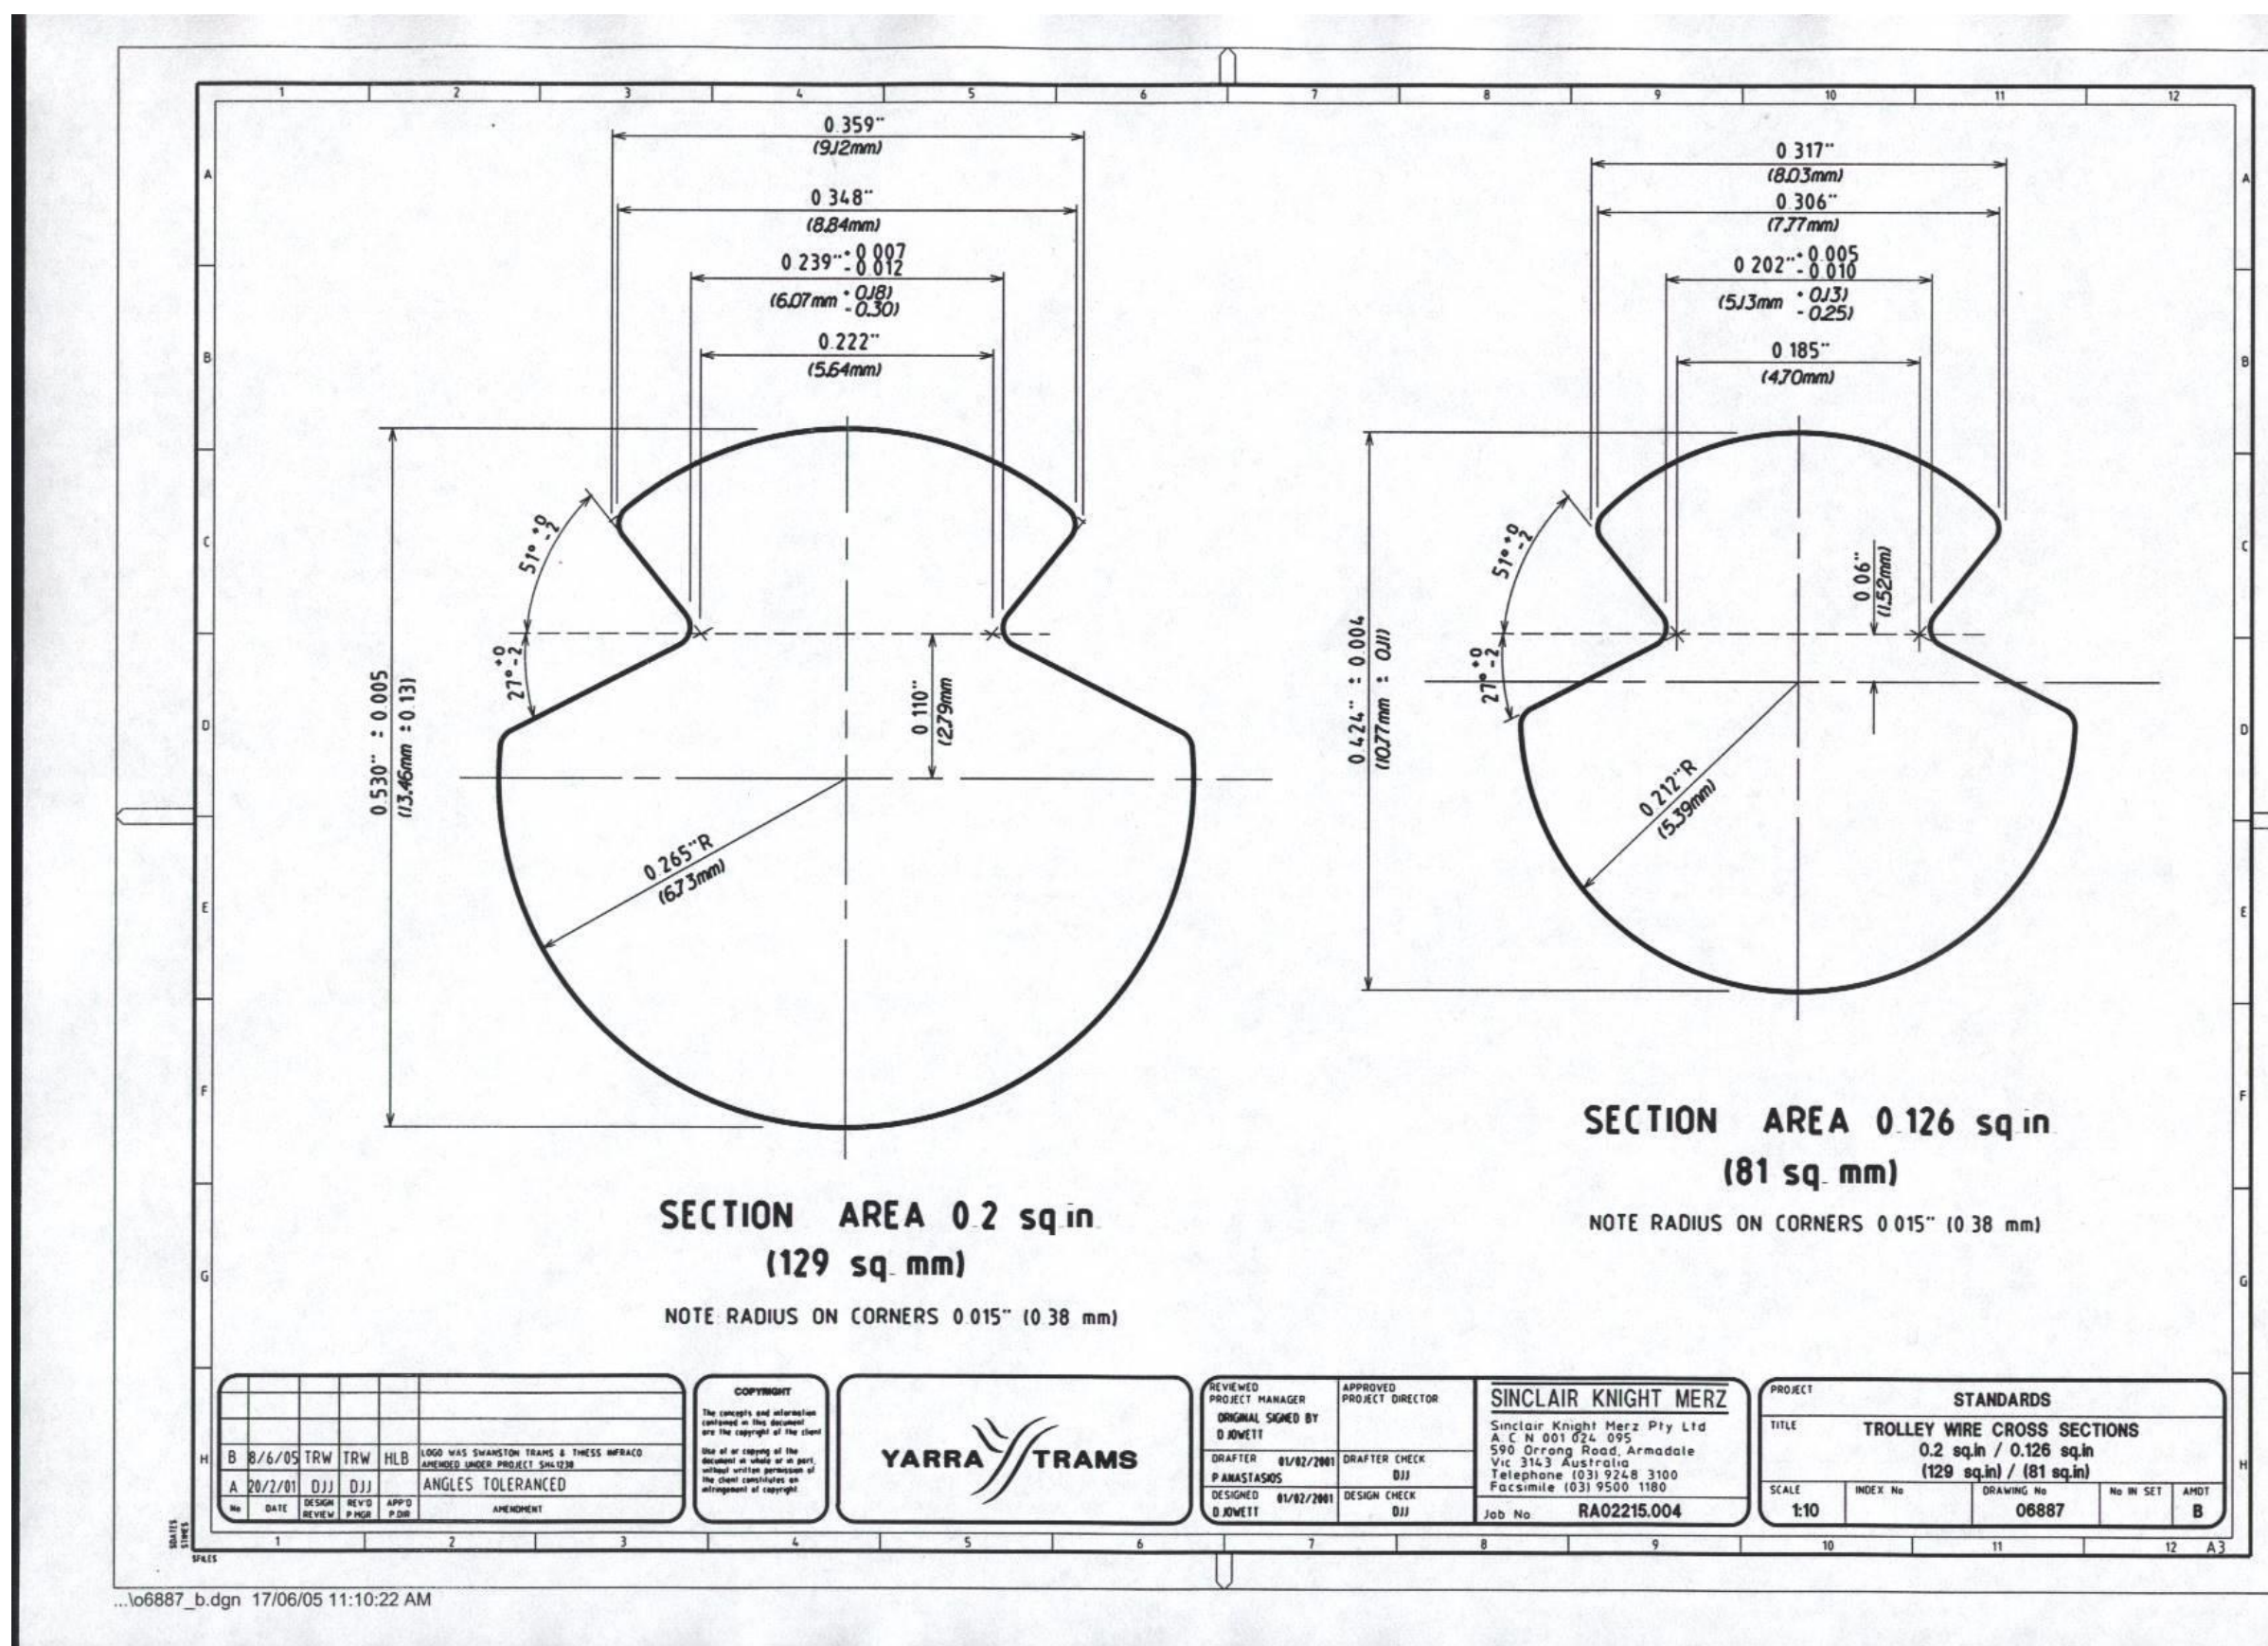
Drawing O6887 Rev.B for 0.2 sq.in. trolley wire (129mm²) and 0.126 sq.in. trolley wire (81 mm²)
